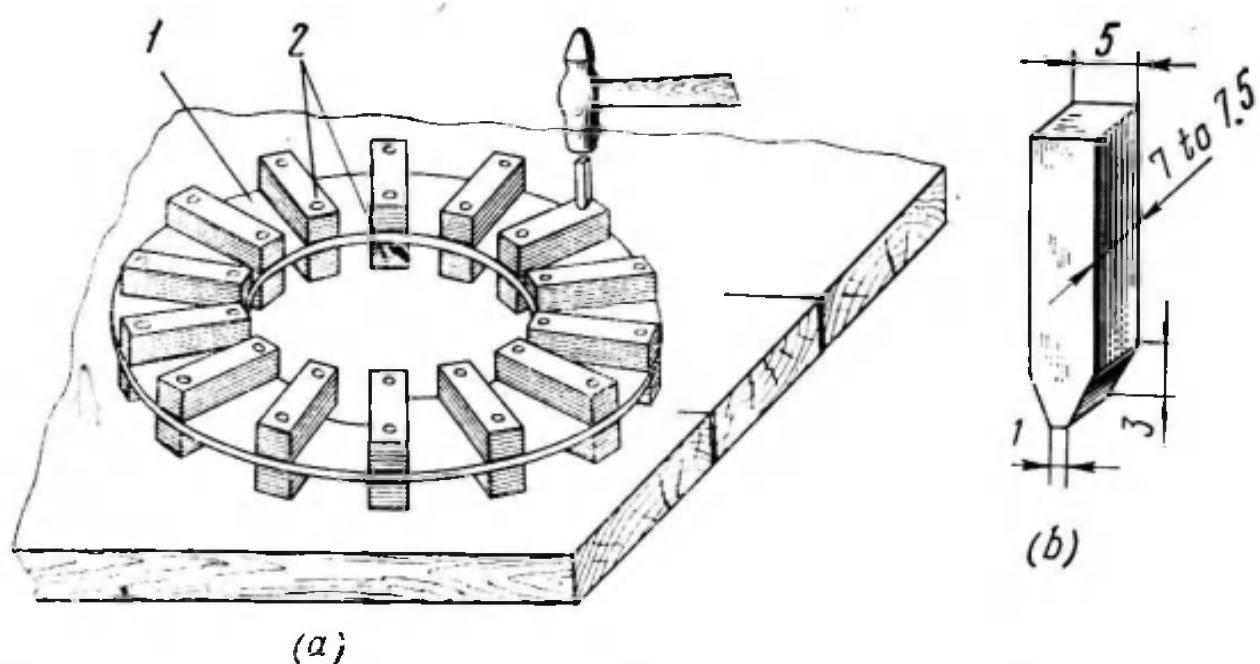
Assembling the yoke insulation of a Size III transformer
